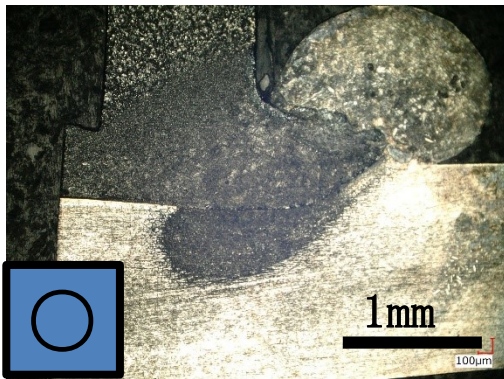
Appearance of specimen after welding and observation method of cross section.
